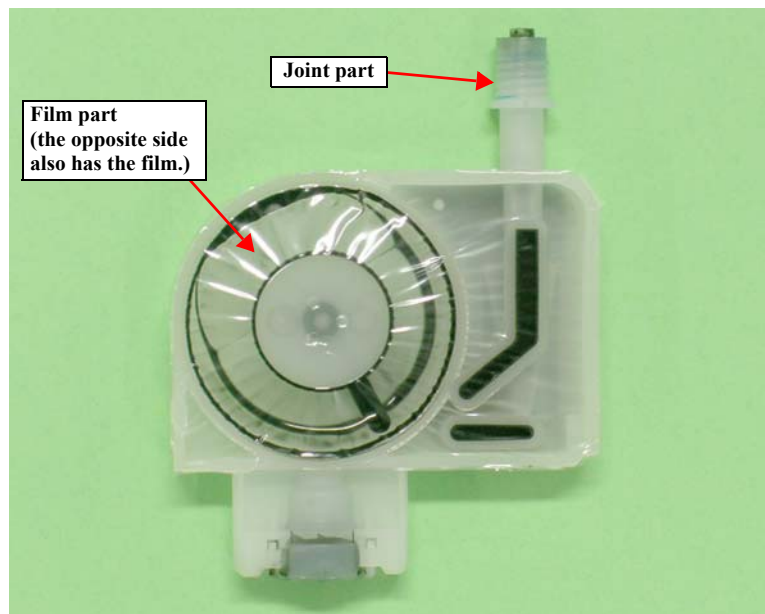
Handling the VALVE ASSY., HEAD; C
